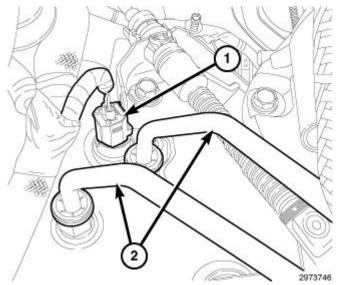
EGR Air Flow Control Valve & CAC Hose Courtesy of CHRYSLER GROUP, LLC
